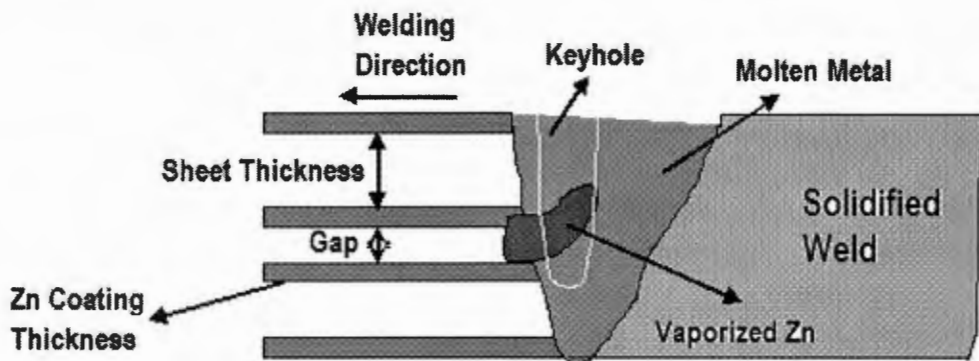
Schematic of welding galvanized steel in lap-joint configuration
